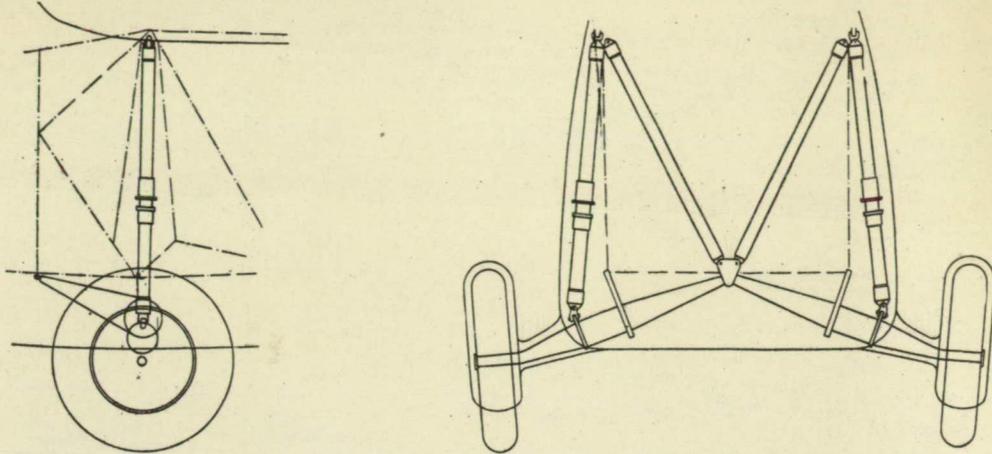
Front and side elevations, axle forging, girder radius rod and oleo leg fitting of the A.W.XV landing gear. "Aeroplane" sketches
